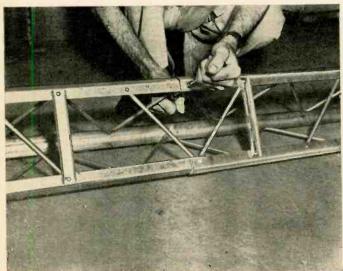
Two sections of steel tower being assembled in shop—expanded ends of one section fit over straight ends of other.
